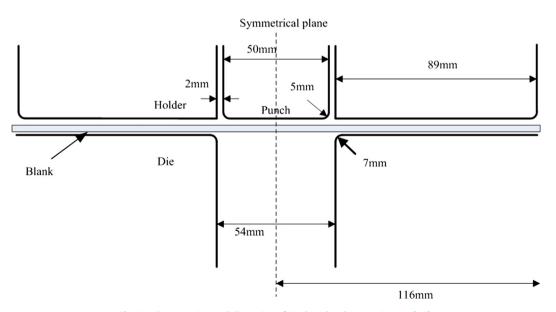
Schematic view and dimension of 2D draw bend test equipment [42].
